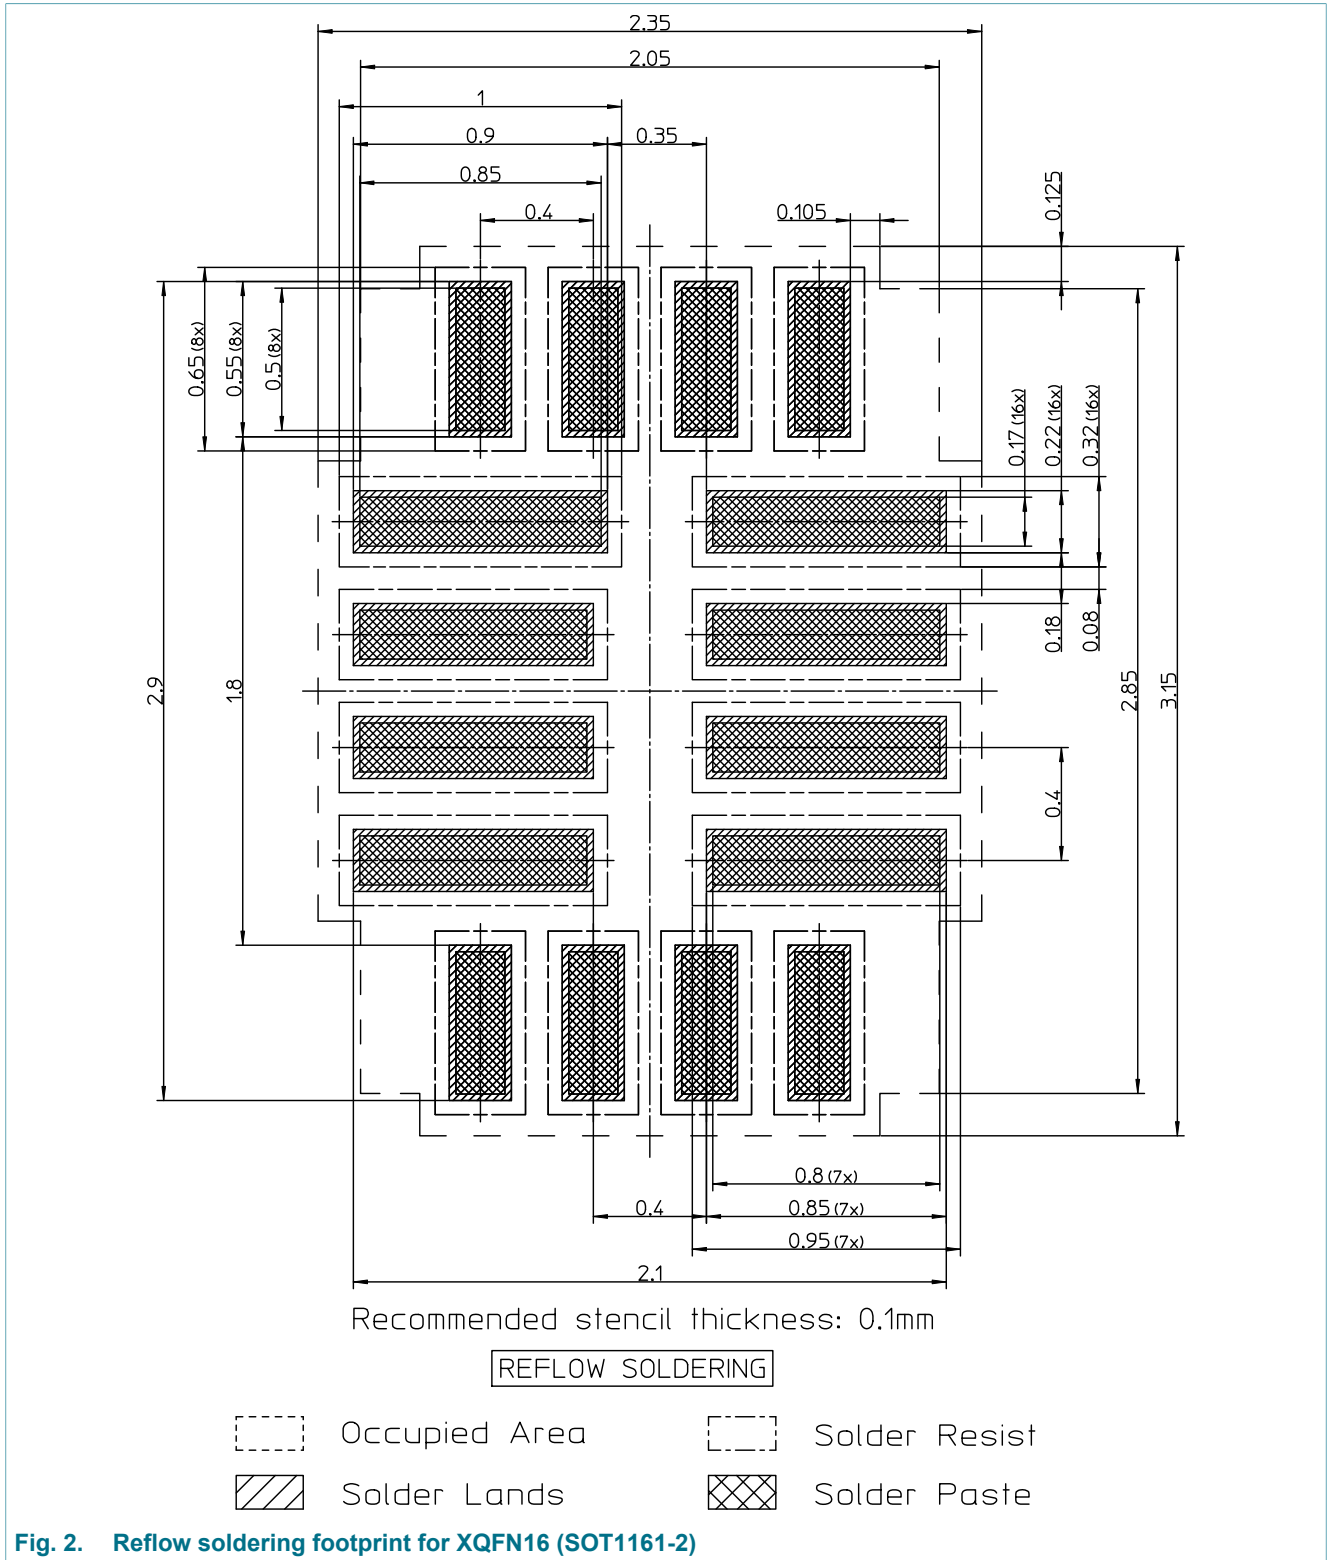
Reflow soldering footprint for XQFN16 (SOT1161-2)
